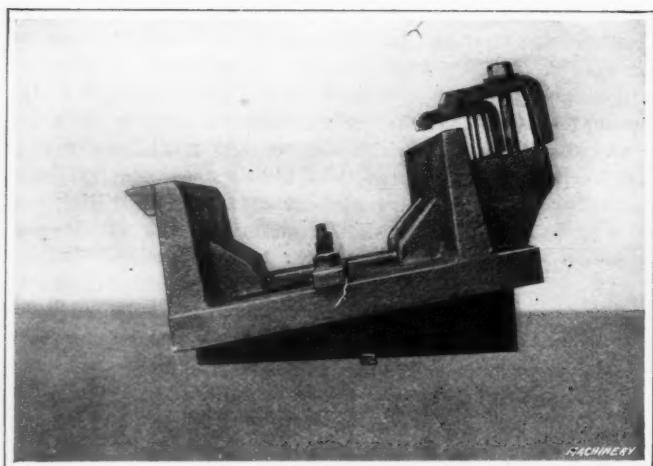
Fixture held on Tapered Base to provide for planing Carriage Cap Bearing at Required Angle
